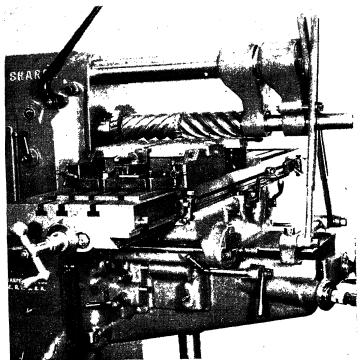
Gang mill. Several cutters mounted to cut more than one surface simultaneously. (Brown and Sharpe.)
